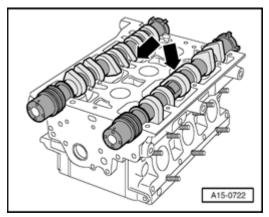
Inserting Camshaft Into Left Cylinder Head
